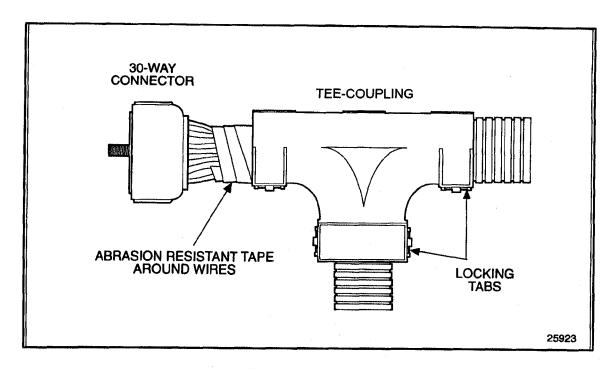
Improved Engine Sensor Harness with Abrasion-resistant Tape
